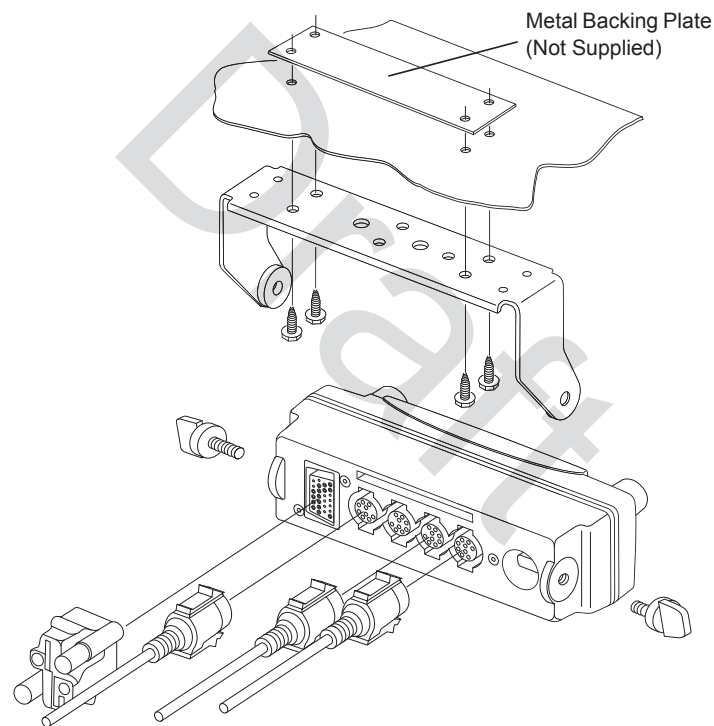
O5 Control Head Installation Exploded View (Also applicable for O2 and O7 Control Heads)
